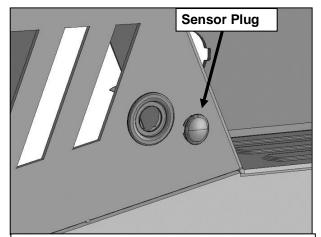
Remove license lights, spare tire access lock, sensors and harness if equipped
